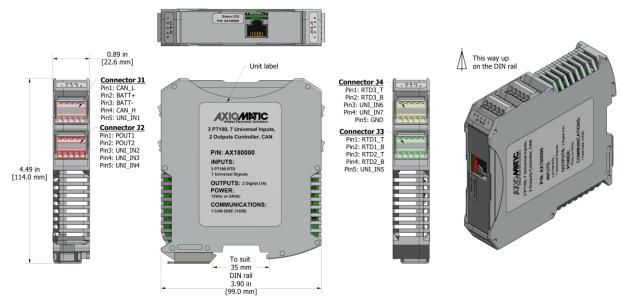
Dimensions of AX180000 (with Ethernet)
